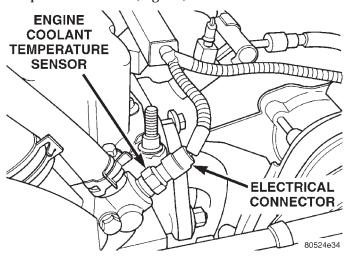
Engine Coolant Temperature Sensor—4.0L Engine
